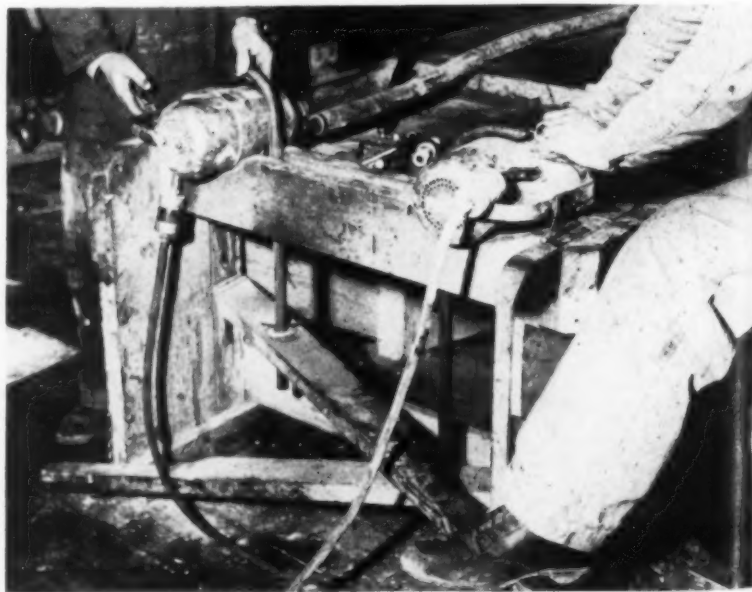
MOTOR END OF BENCH has quick-acting clamps for holding motor frames for disassembly, inspection and minor repairs.
